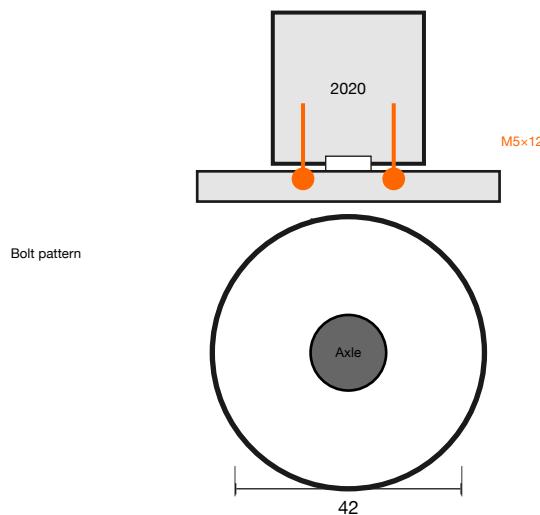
Hub motor mounts directly to extrusion. No bracket required.
